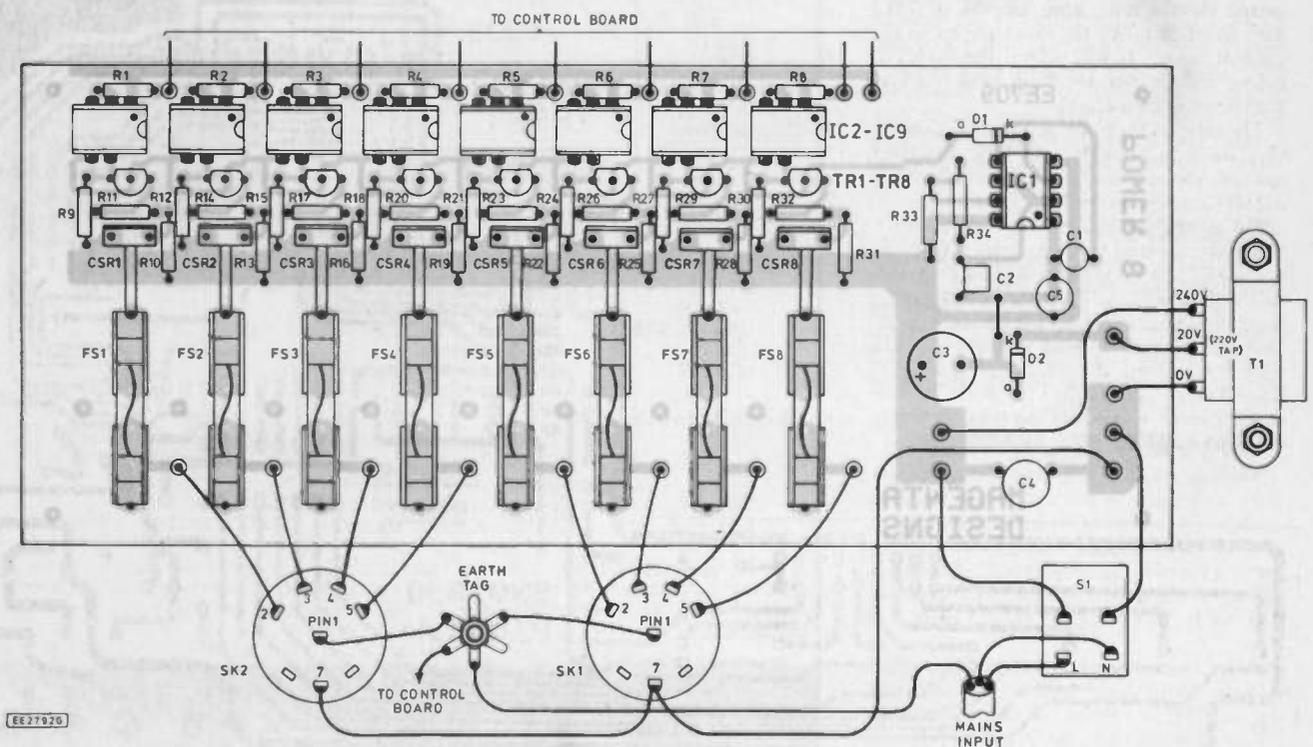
Printed circuit board component layout and full size copper foil master for the Power Board
